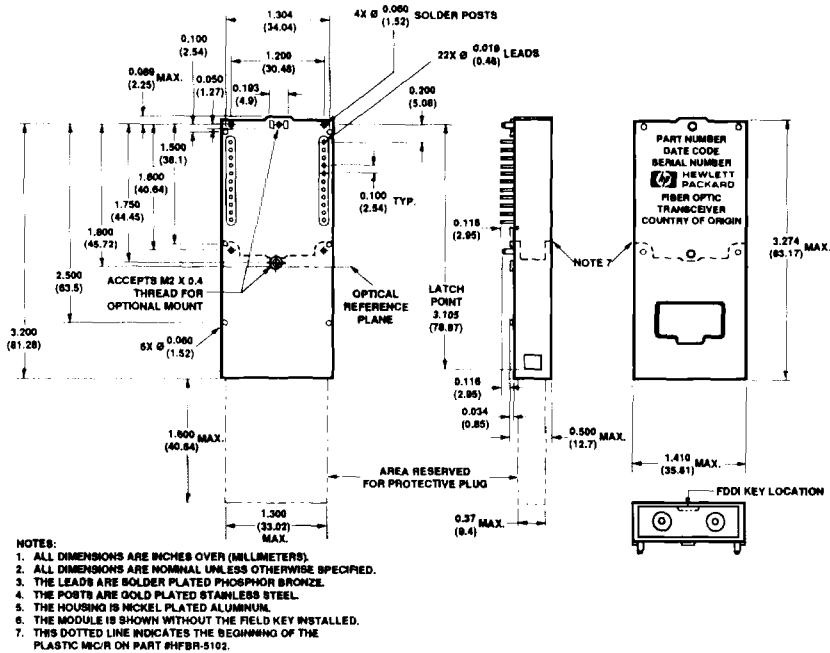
Outline Drawing. HFBR-5101 – Metal MIC/R, HFBR-5102 – Plastic MIC/R
